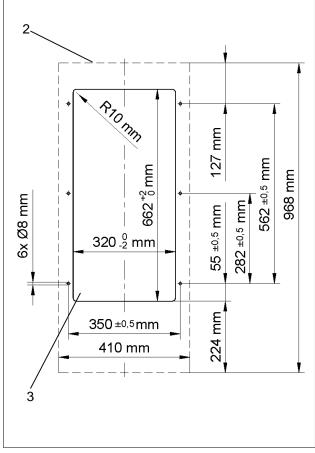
Switch cabinet exterior view Holes for DTS cooling unit
